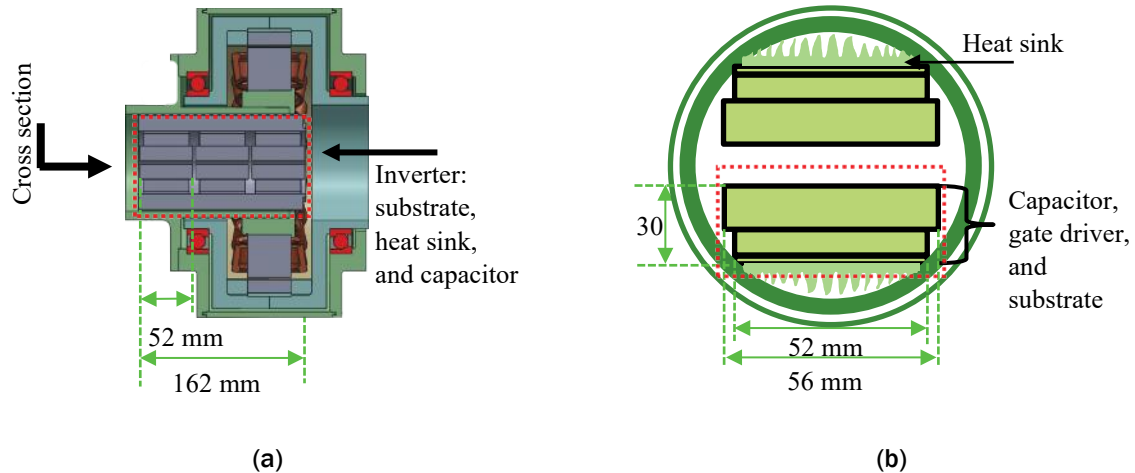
(a) Inverter dimensions for integrating an internal stator mount with an outer rotor motor and (b) an inverter cross section that shows the height and width of the inverter.
